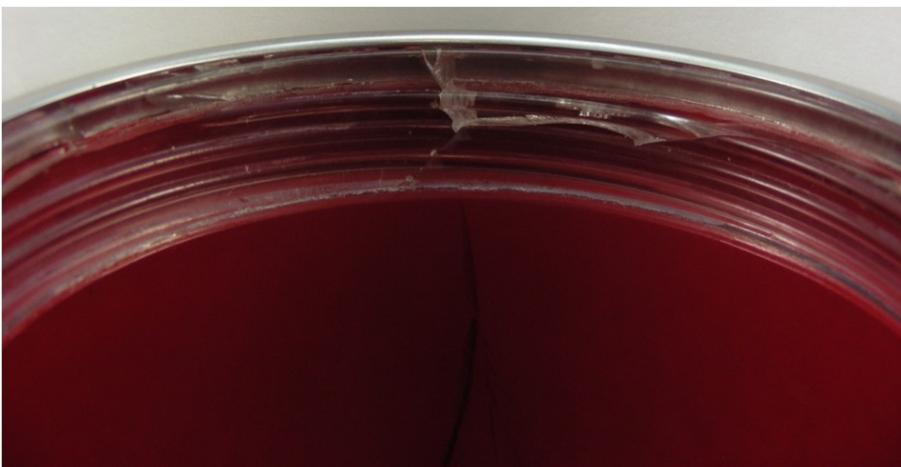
View of the cracking in the threaded section of the travel mug.
